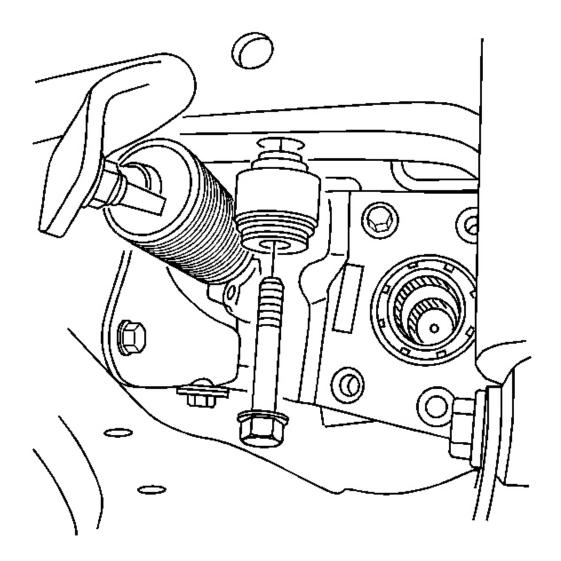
View Of Mounting Bracket To Frame Bolts Courtesy of GENERAL MOTORS CORP.
